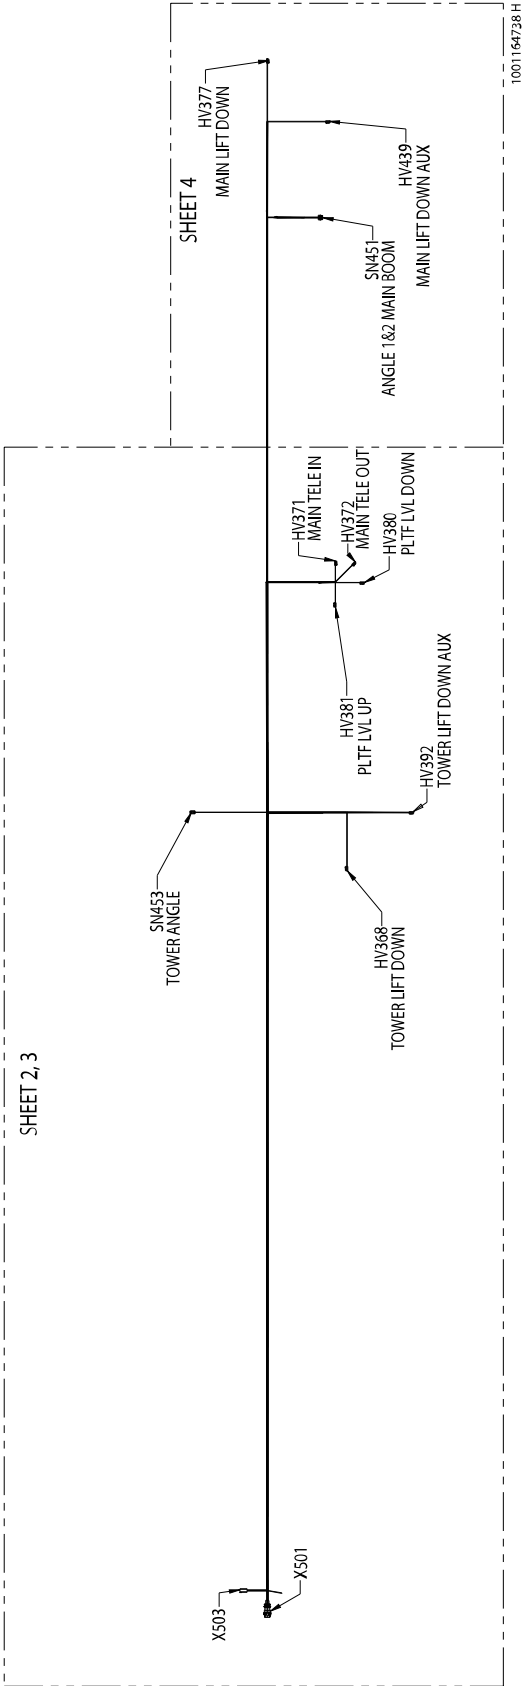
Tower Upright Valve Harness - Sheet 1 of 4
